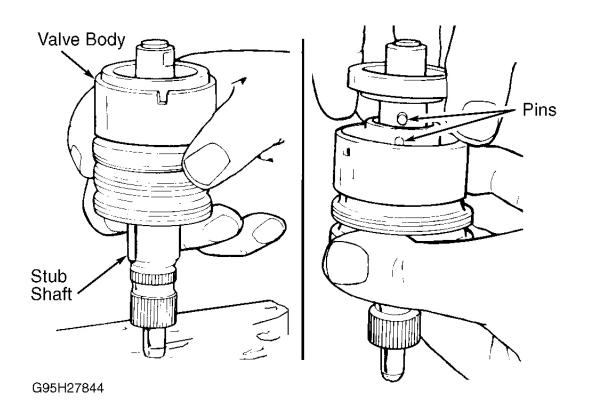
Removing Stub Shaft From Valve Body Courtesy of GENERAL MOTORS CORP.
